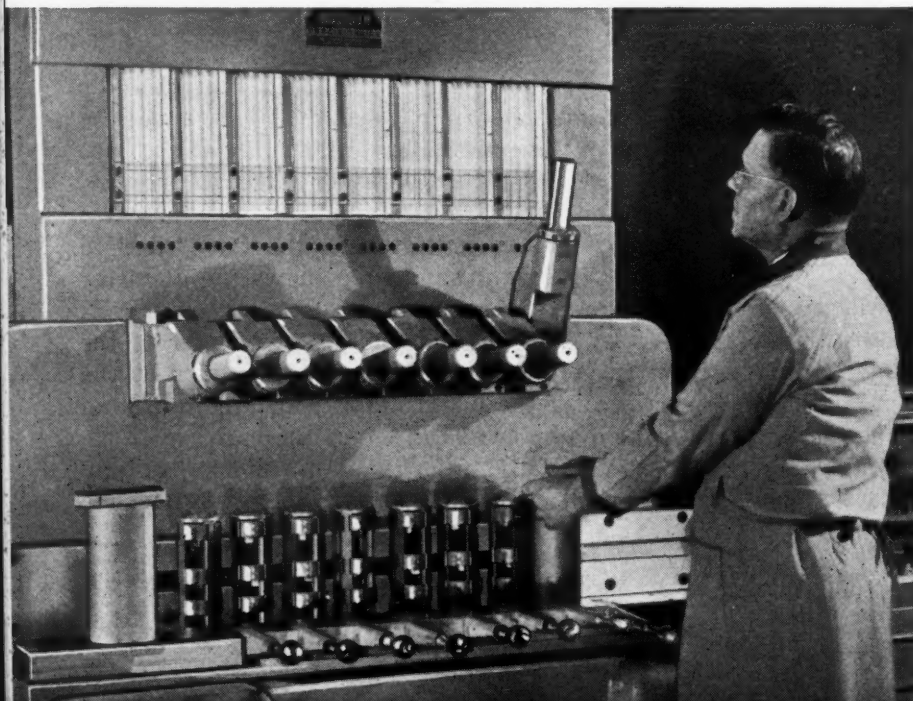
Here the Inspector is Calibrating the Set of Tubes Used in Gaging the Right-hand Cylinder Bore. A Minimum Bore-size Master Ring Gage is Employed
